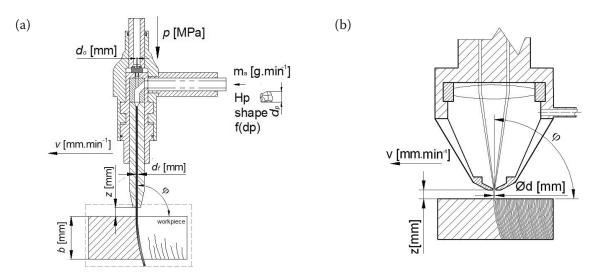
Details of the cutting head with the target material (a) abrasive waterjet cutting (b)  $CO_2$  laser beam cutting
